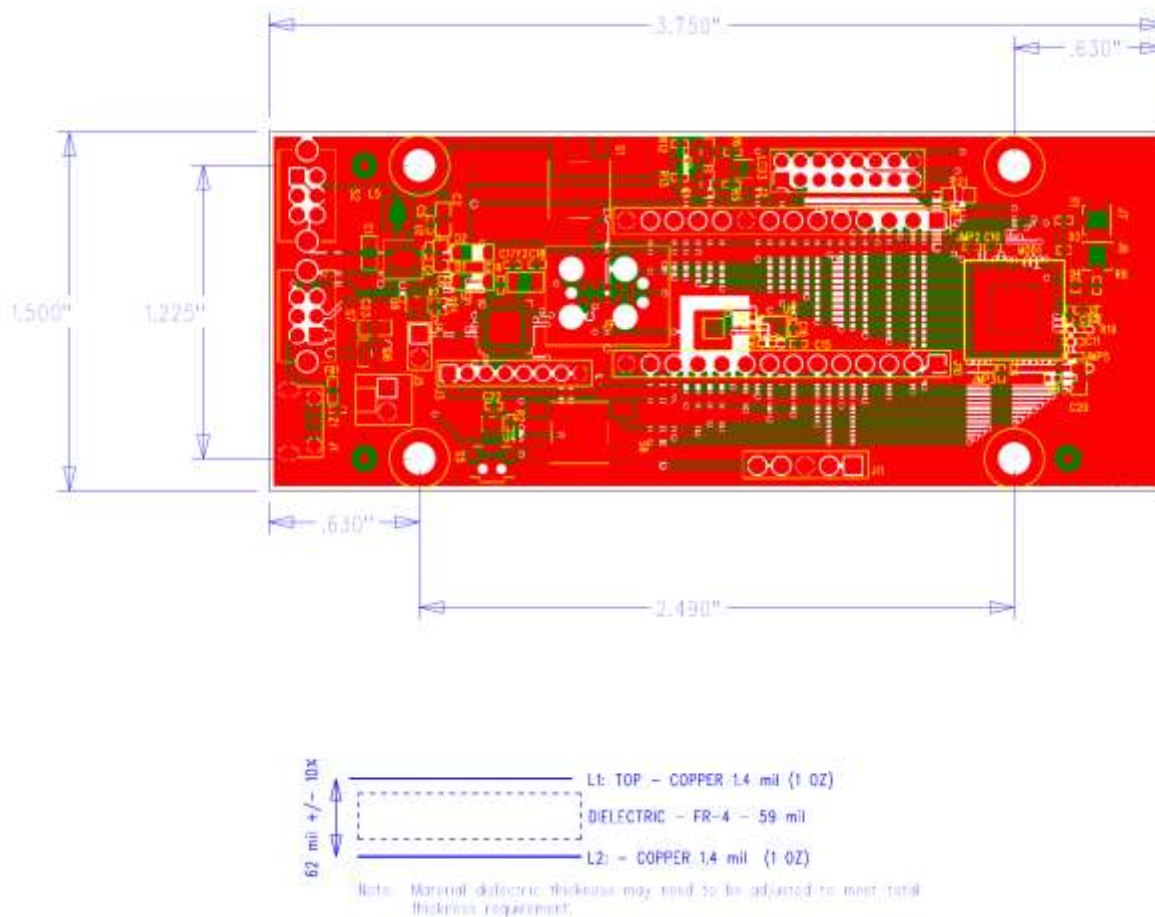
2-Layer Dipole and FlexPIFA Trace Antenna PCB Layout
